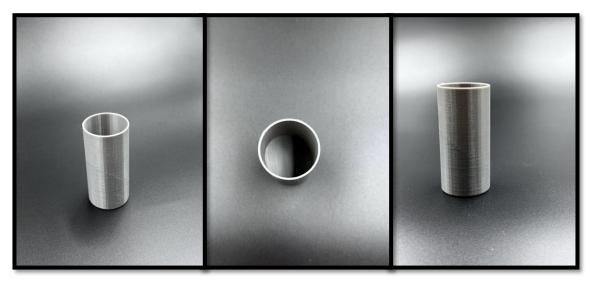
3D printed small parts testing fixture 8.5.6.2. Test Procedure
